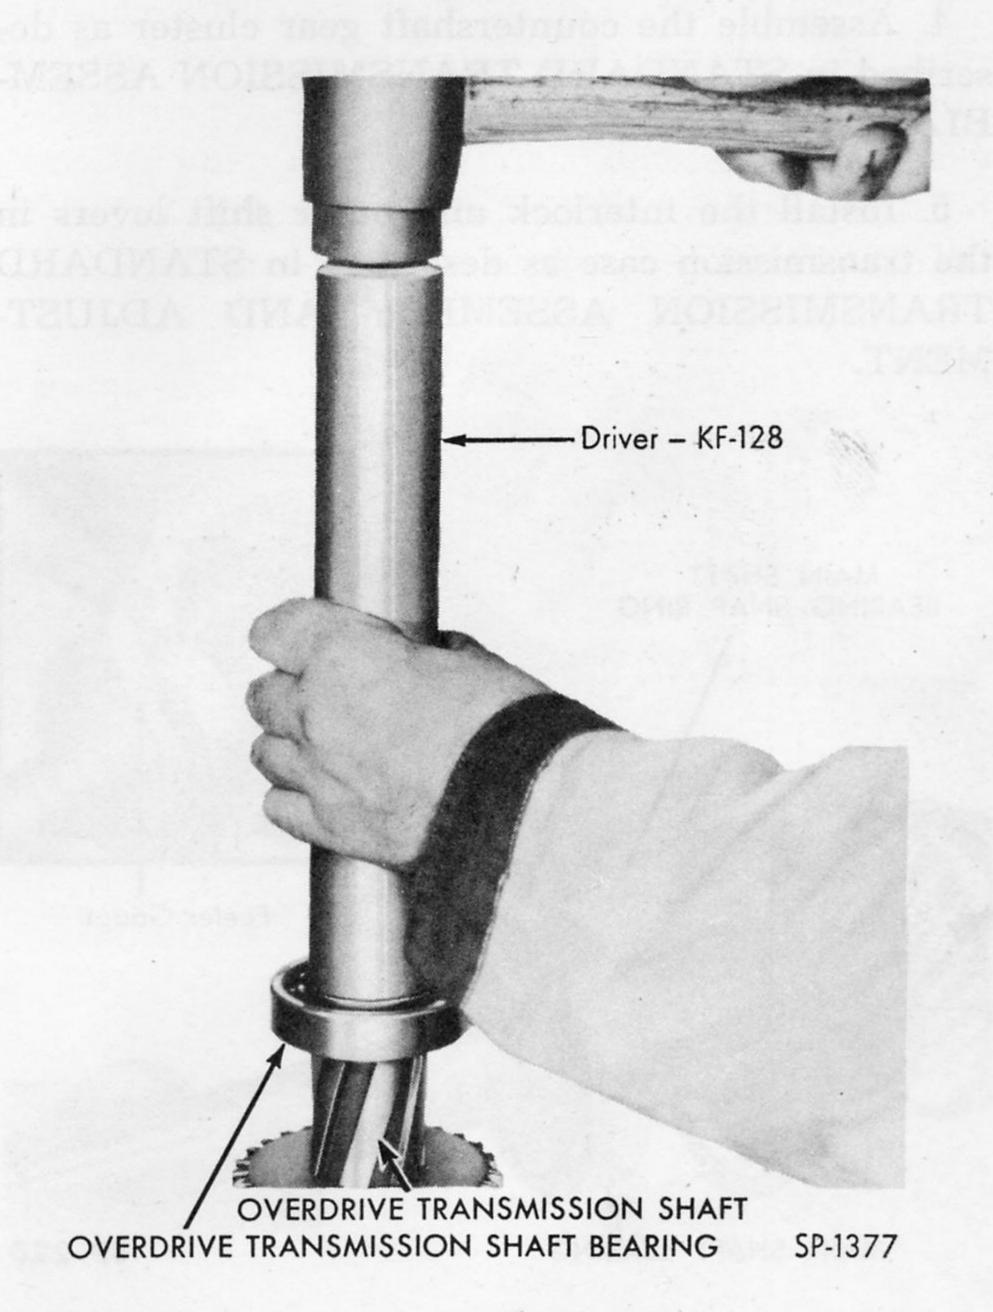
Installing Overdrive Transmission Shaft Bearing
